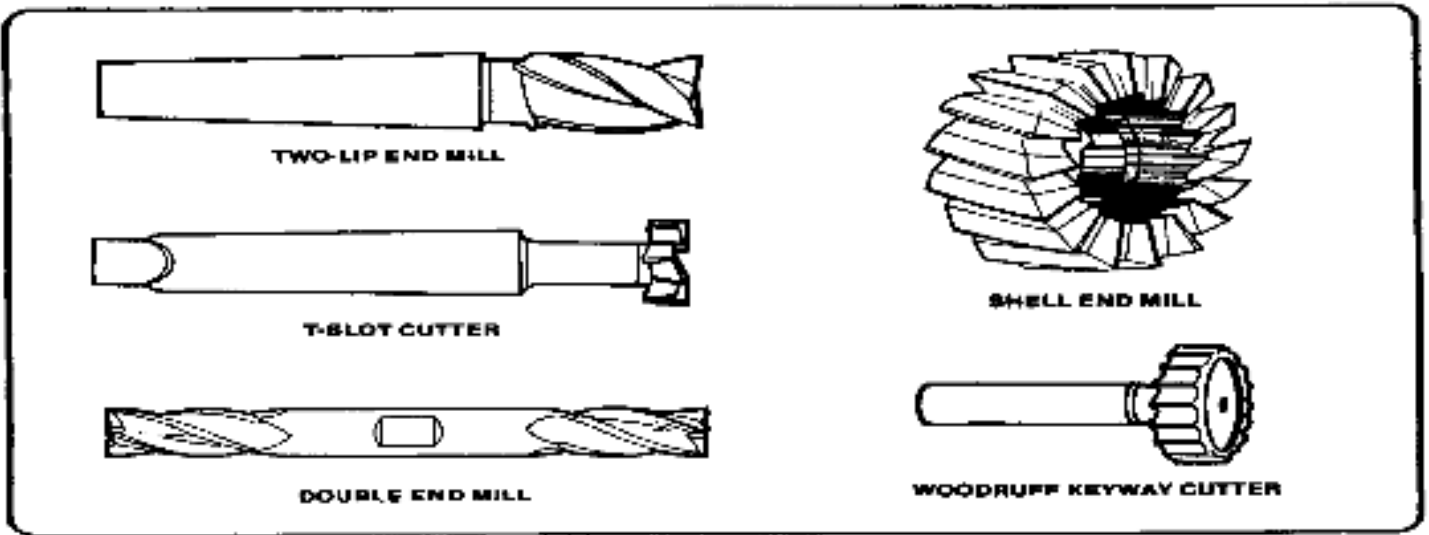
End mill, T-slot, and Woodruff keyway cutters.
